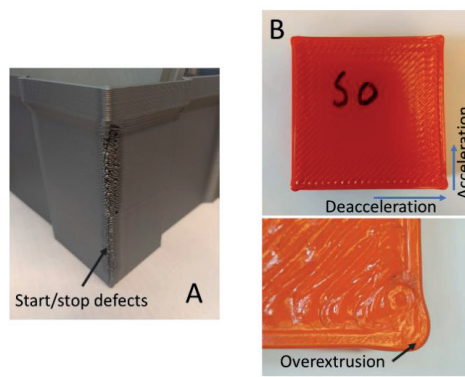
Picture of A) defects due to start and stop of extrusion and B) due to acceleration/deacceleration. Parts are printed using a large scale FDM printer from 3DPlatform. Pictures in B) are reproduced from Paper 2.
